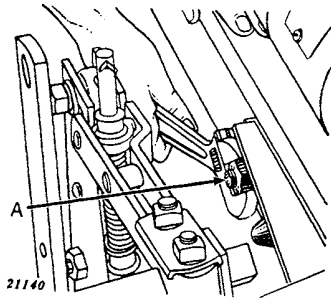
Detaching Cultivator with Quik-Tatch Frame
